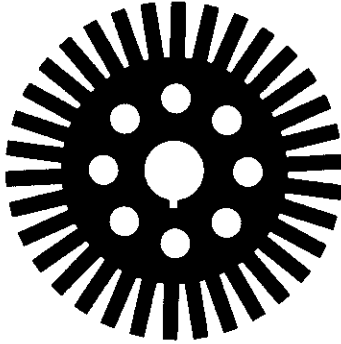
Drum armature stamping with axial flow ventilation system.
